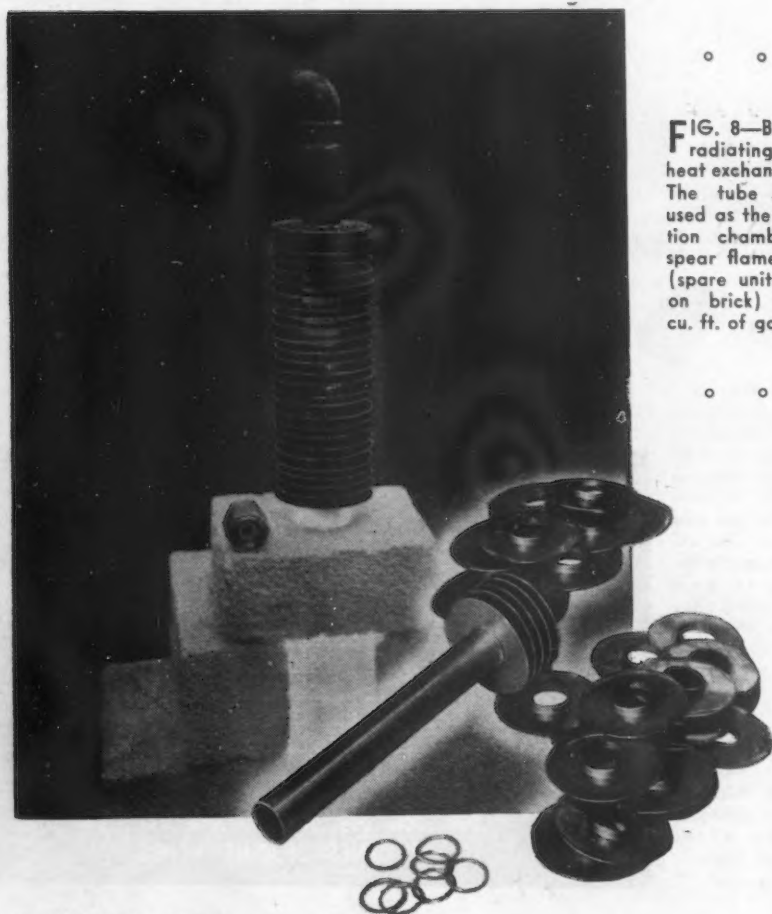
Brazing of radiating fins to heat exchanger tube. The tube itself is used as the combustion chamber. The spear flame burner, (spare unit is lying on brick) uses 70 cu. ft. of gas per hr.
